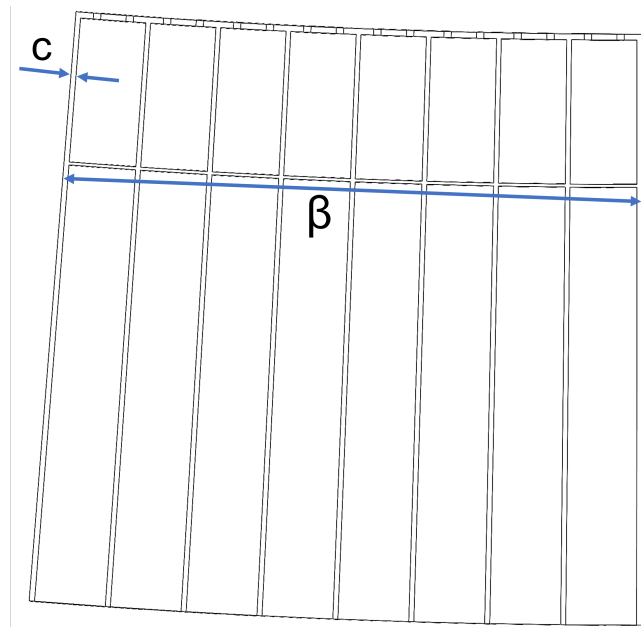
End view of the ANCF T-Liner design with a section view cut through the second row of the unit cell, R2.
